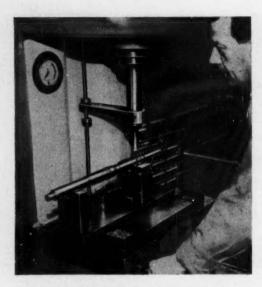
The Outer Ends of the Radial Holes Drilled in the Mainshaft are Peened with a Bearing Ball on this Press, to Ensure that there are no Loose Metal Particles which Might Become Detached in Service
